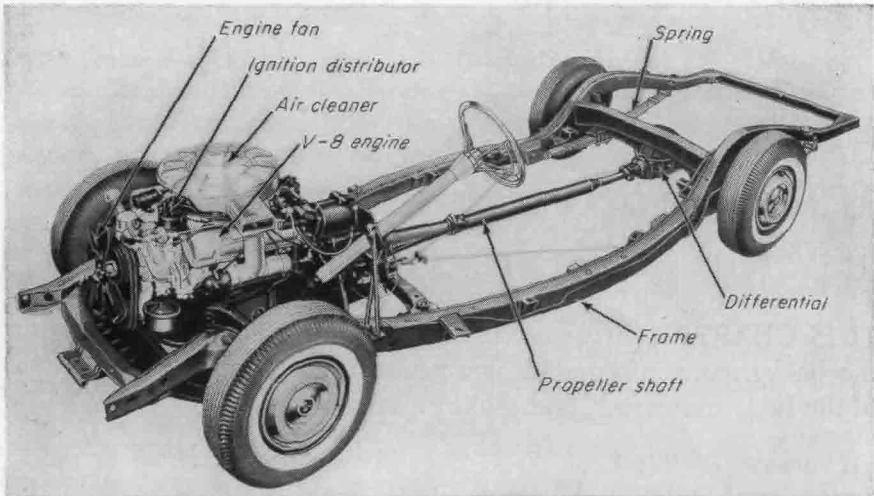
Chassis of a passenger car. (Mercury Division of Ford Motor Company)
